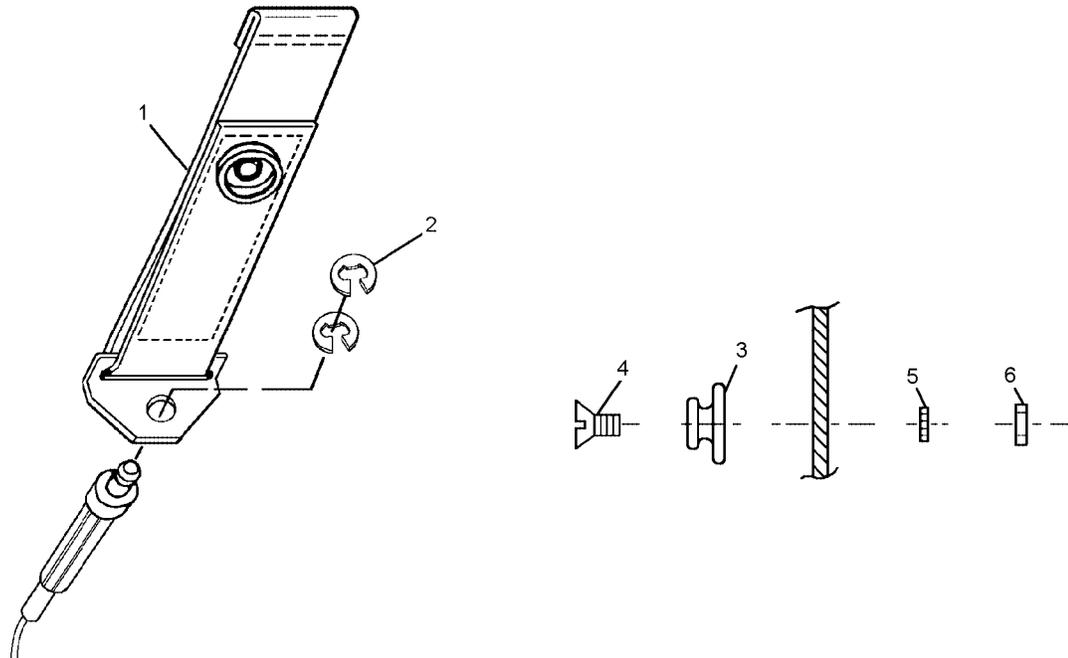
CBR Adapter Strap Assembly Fitting Kit
